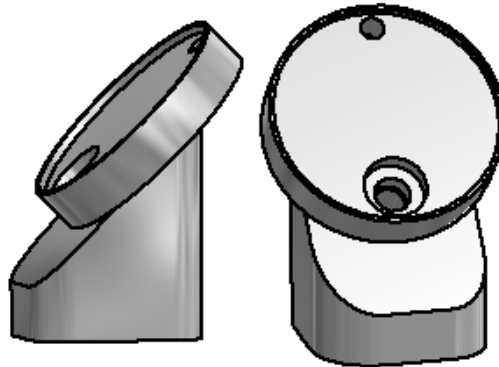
Two views of the design of the secondary target's support: technical details in Appendix 1: A.8 and A.9
